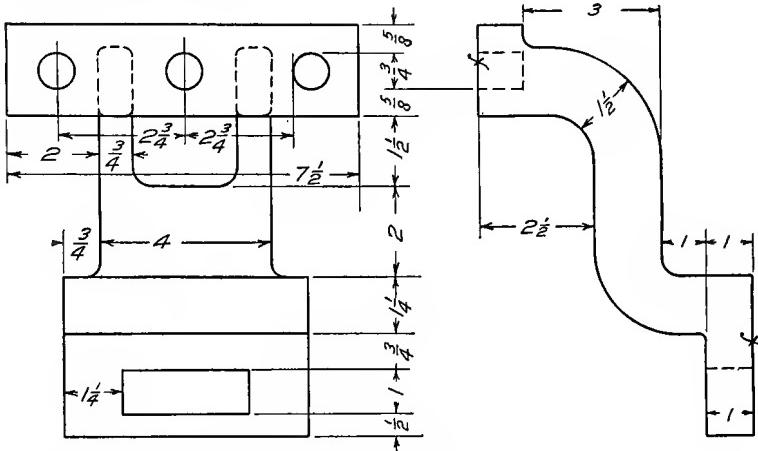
Prob. 46. An incorrect drawing to be checked for errors.
